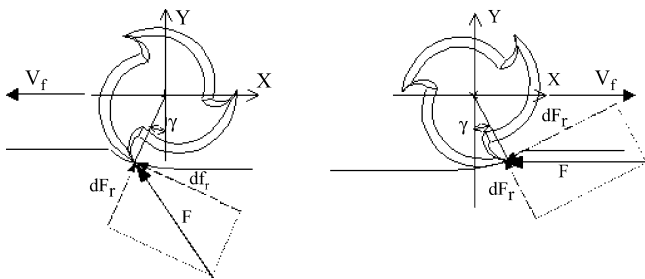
Direction of cutting forces in down milling (a) and up milling (b).
